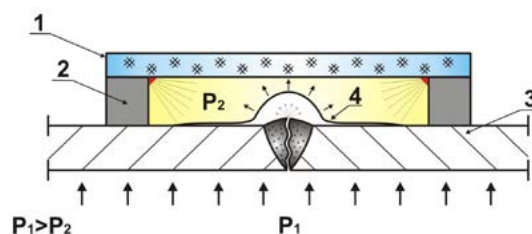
Principle of testing the leaktightness of welded joints by means of a bubble test with a vacuum cap:
